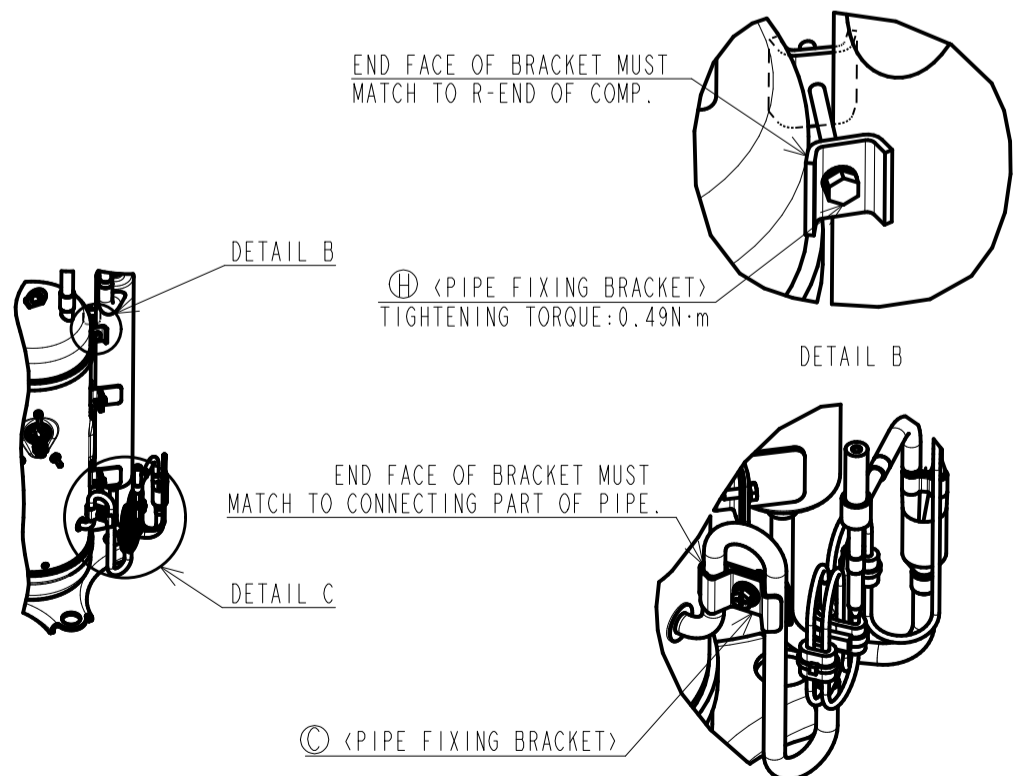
INSTALLATION DETAILS OF PIPE FIXING BRACKET
